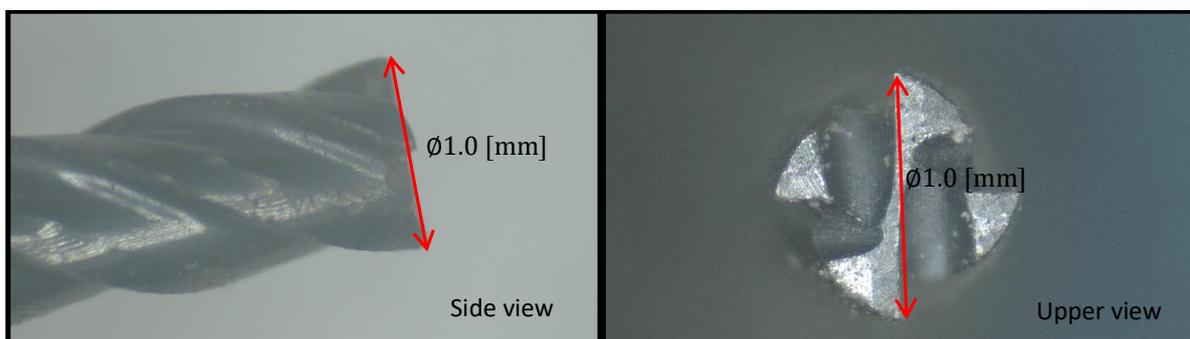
4 flutes 1 mm diameter tungsten carbide tool
